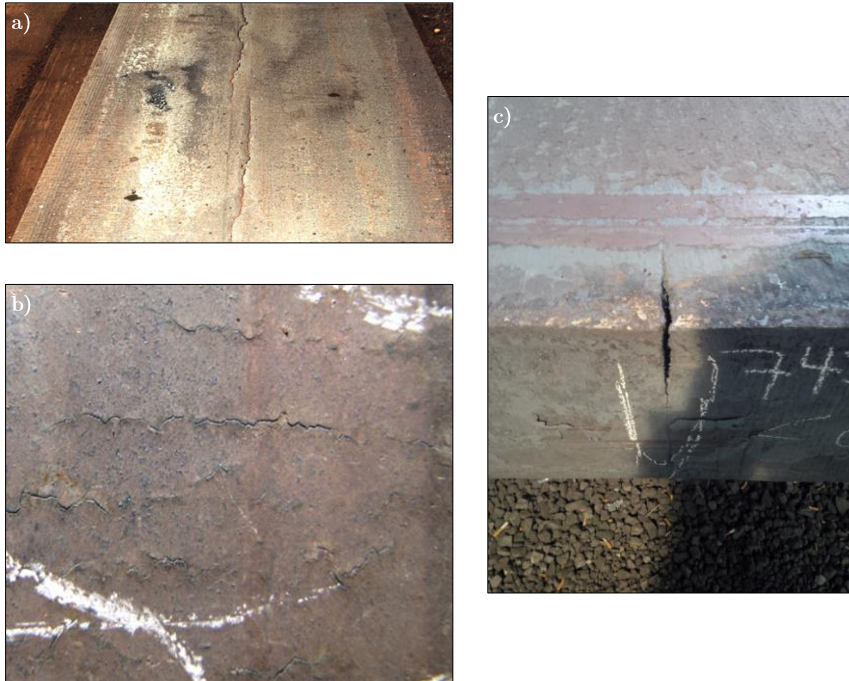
Continuously cast slabs with diverse surface defects. a) Longitudinal surface cracks, b) transverse surface cracks and c) transverse corner crack.
